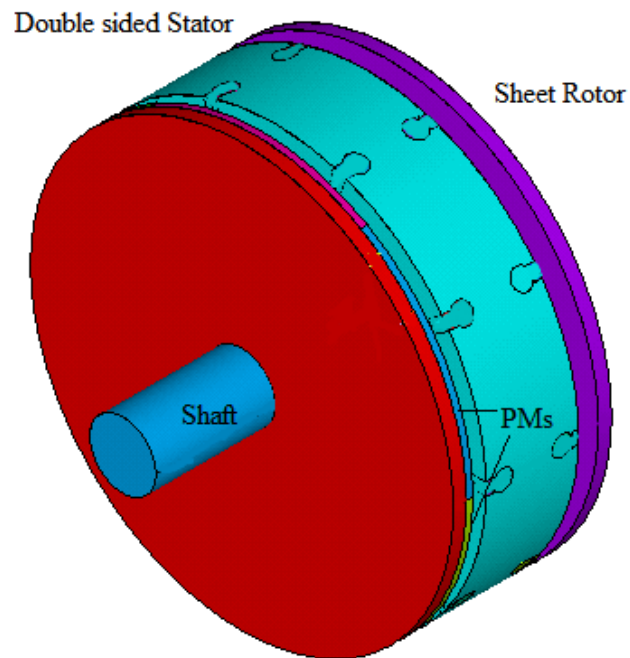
Typical arrangement of the AFPM machine with PM rotor on one side and Al sheet rotor on the other
